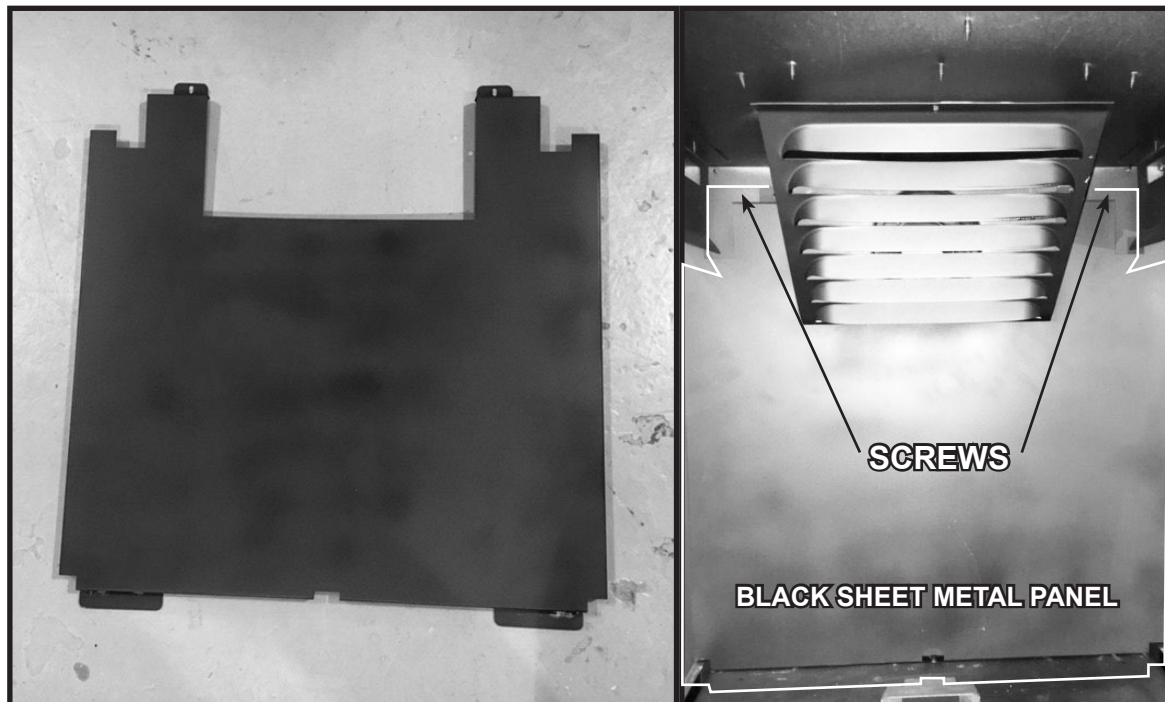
Black Sheet Metal Panel Identified (Left) and Installed (Right)
